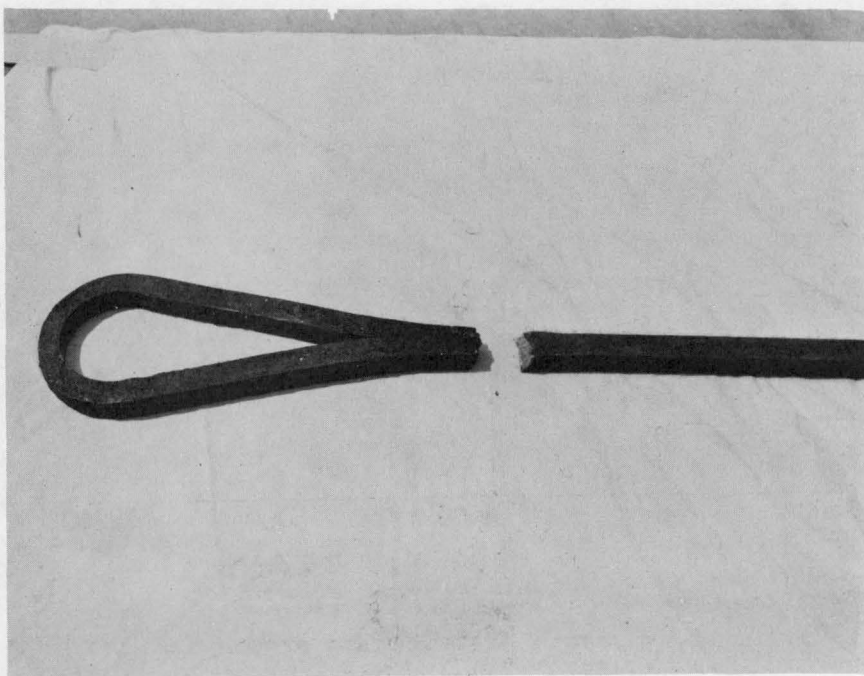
Photograph showing the fatigue fracture in the forging near an eye.
